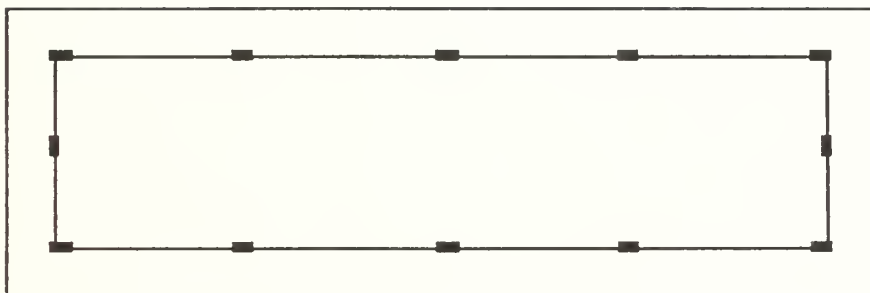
Location of Tack Welds on the Cover Plate of the Pocket Plate Configuration.
